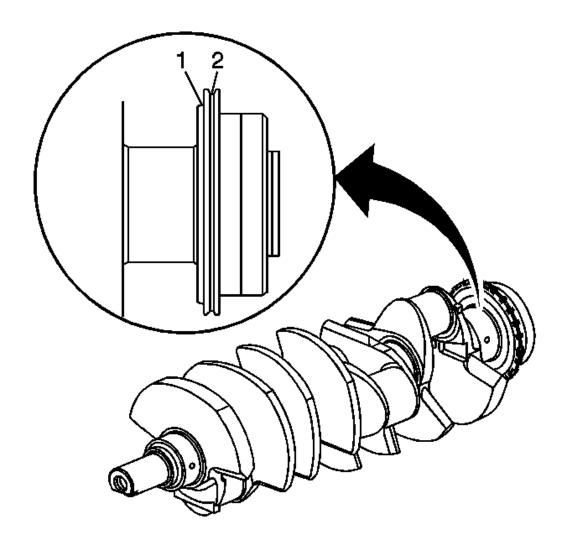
Measuring Reluctor Wheel Gaps Courtesy of GENERAL MOTORS CORP.
